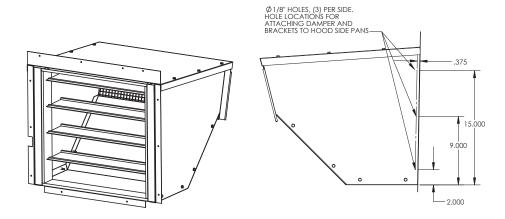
EA BACKDRAFT DAMPER INSTALLED IN EA HOOD
